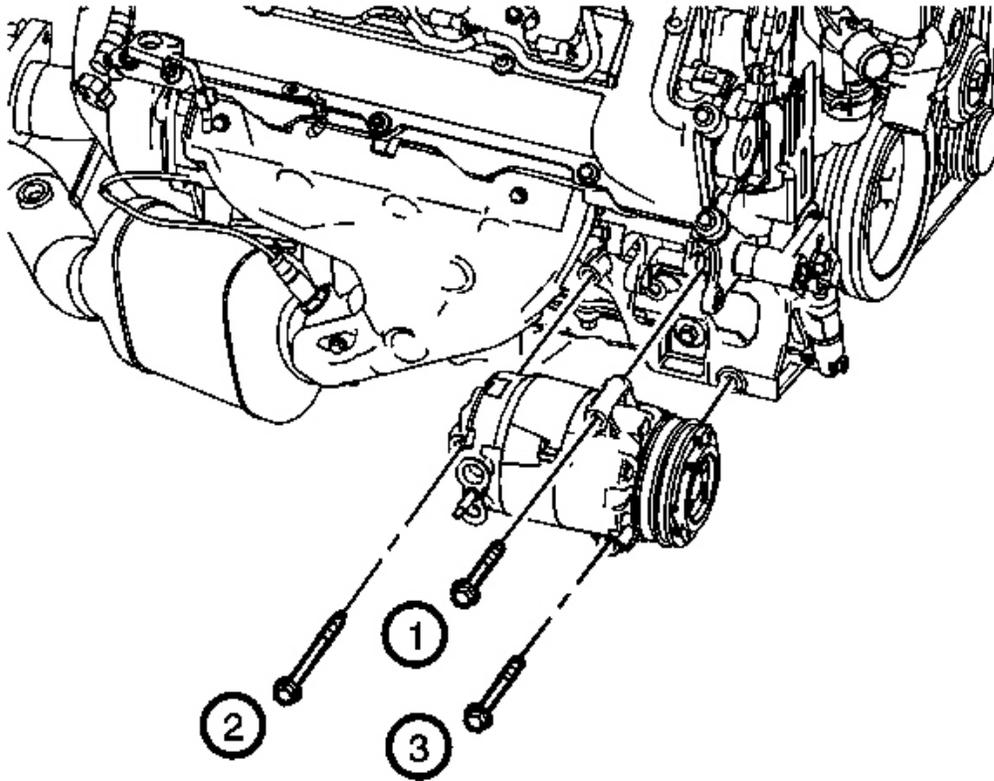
Identifying A/C Mounting Bolts With A/C Compressor
